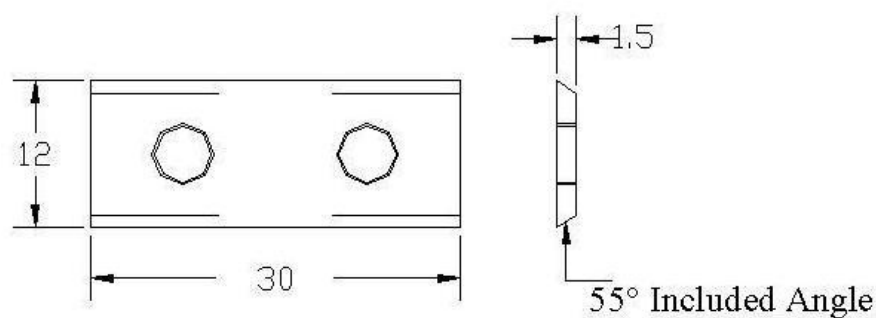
Schematic of the carbide cutting insert (all dimensions in mm).
